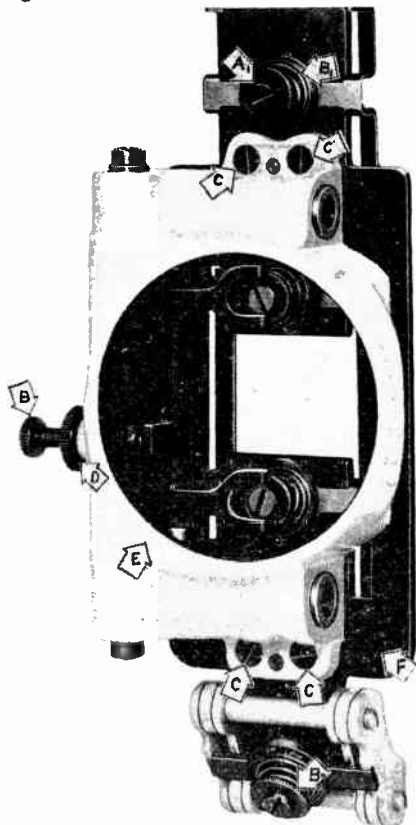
Simplex projector system. In the figure A₁ represents top tension pad adjusting nut retaining screw; A₂, intermittent tension shoe adjusting nut retaining screw; B, long tension pad adjusting screw; B₁, top tension pad adjusting nut; B₂, intermittent tension shoe adjusting nut; C, gate casting fastening screws; D, long tension pad adjusting screw lock nut; E, gate casting; F, gate plate.
